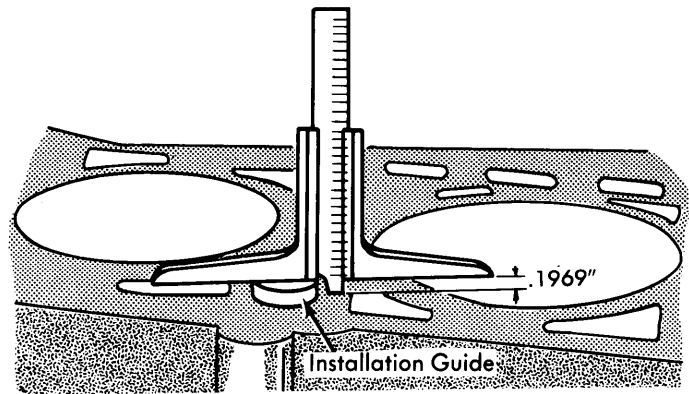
Correct Procedure to Measure Cylinder Head Installation Guide
